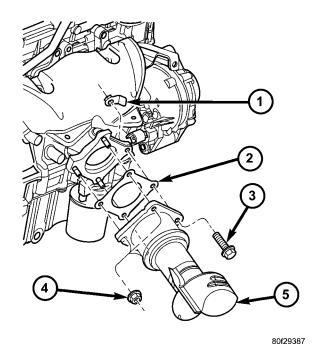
Converter to Exhaust Manifold Connection - 2.0L
